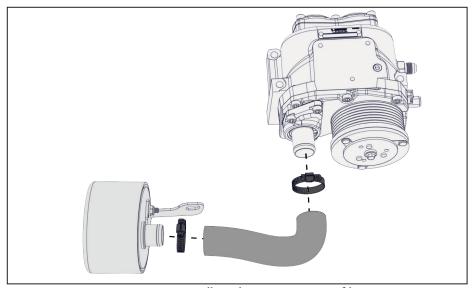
Installing the compressor air filter (A900022 main bracket)
